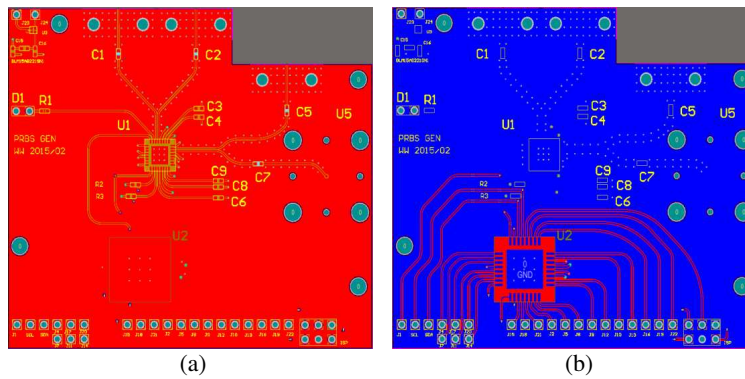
The PCB layout of the (a) top and (b) bottom layers of our evaluation board.
